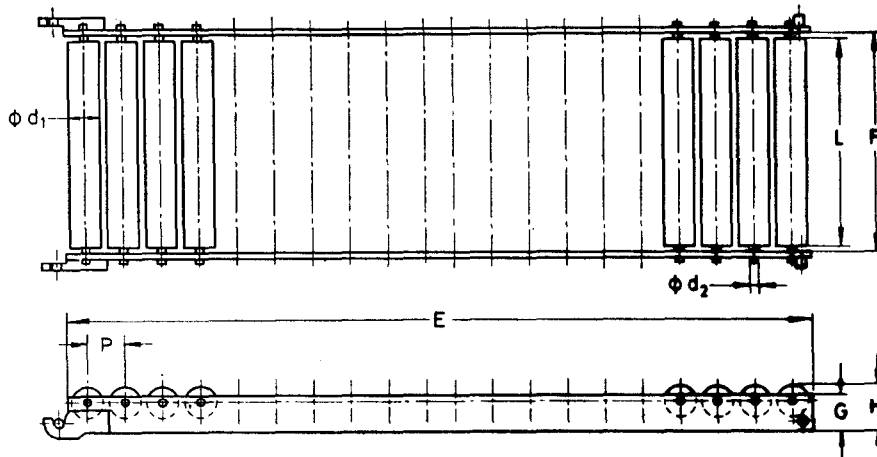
DIMENSIONS FOR STEEL ROLLER CONVEYORS (STRAIGHT SECTION FRAME)
